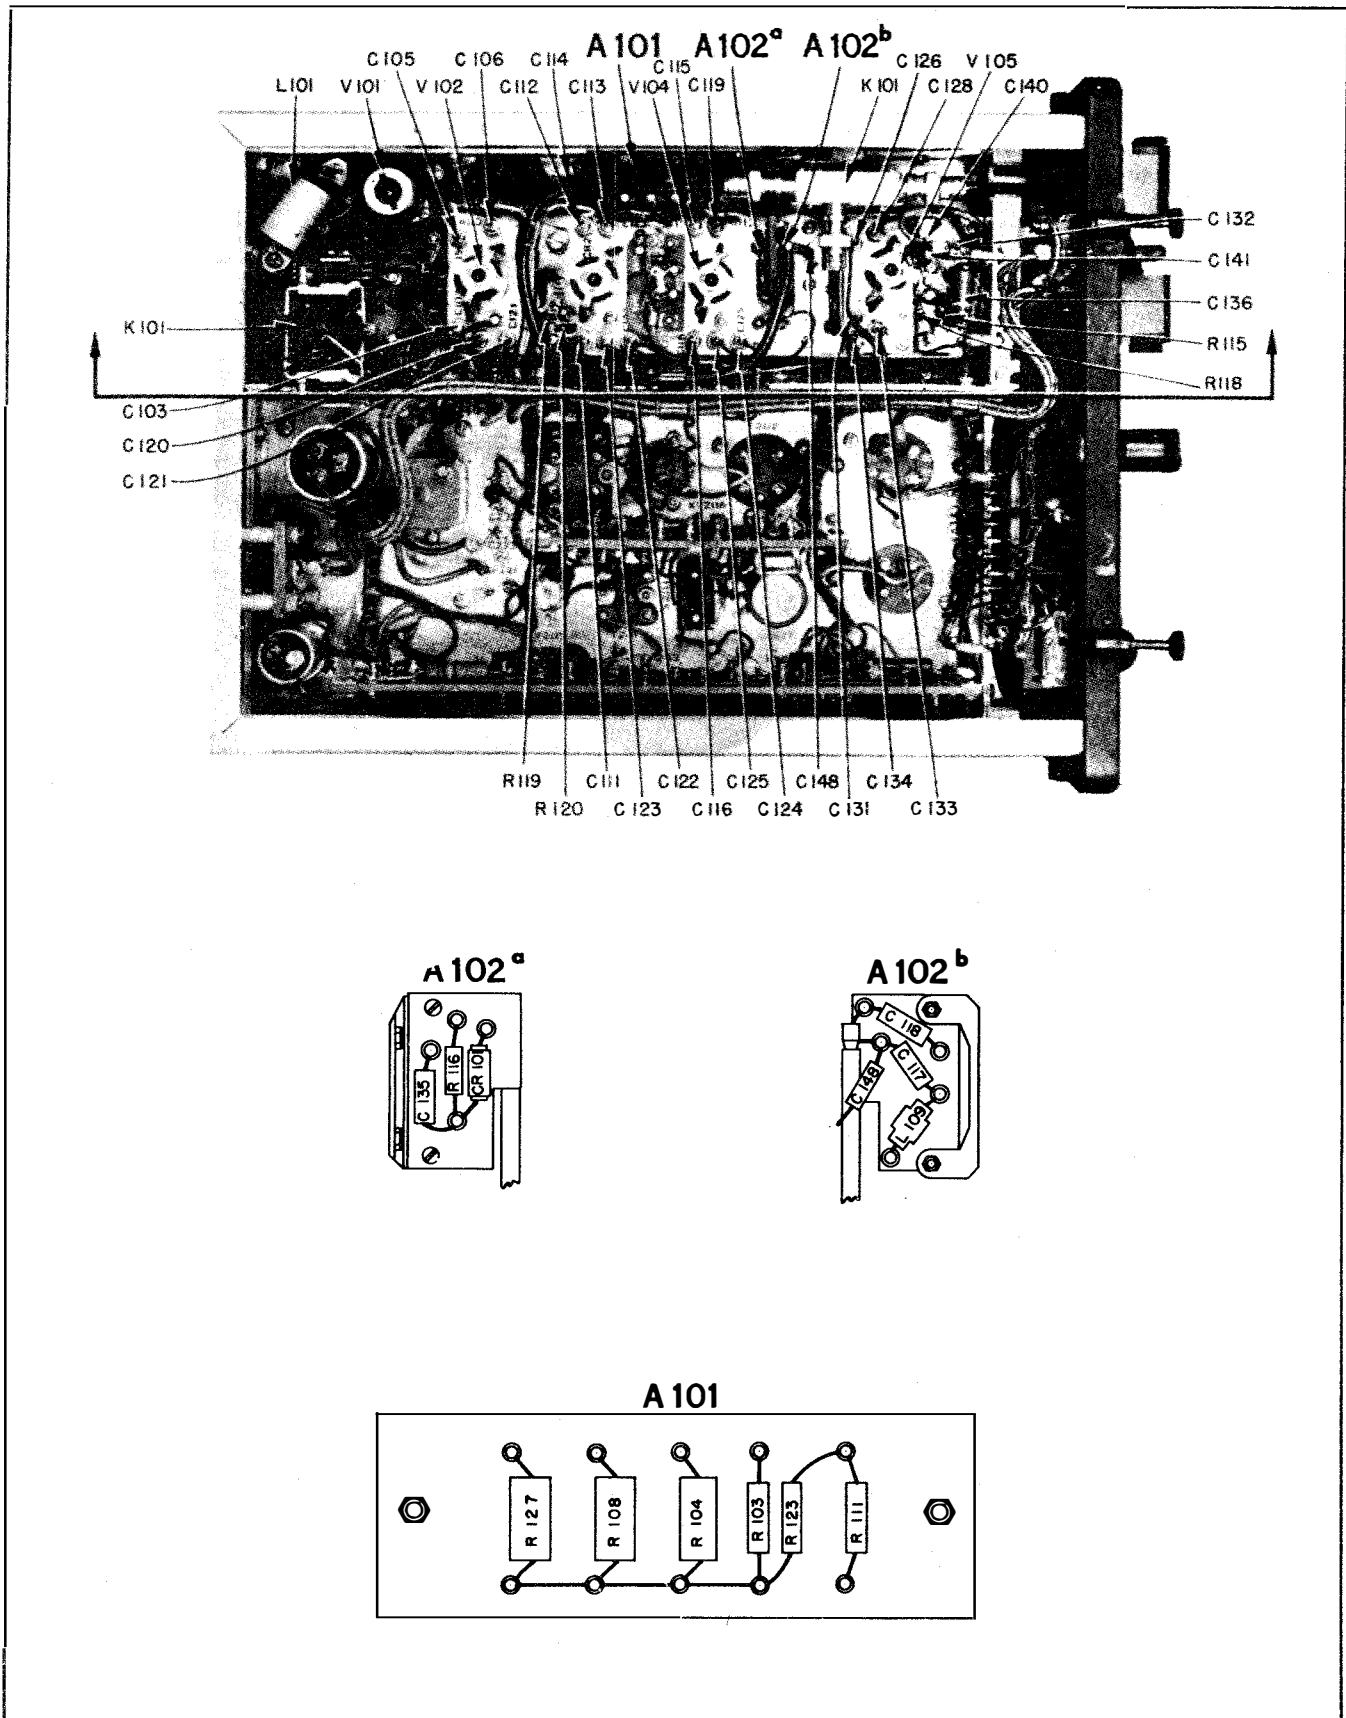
Top View of RF Chassis, Showing Component Locations.
